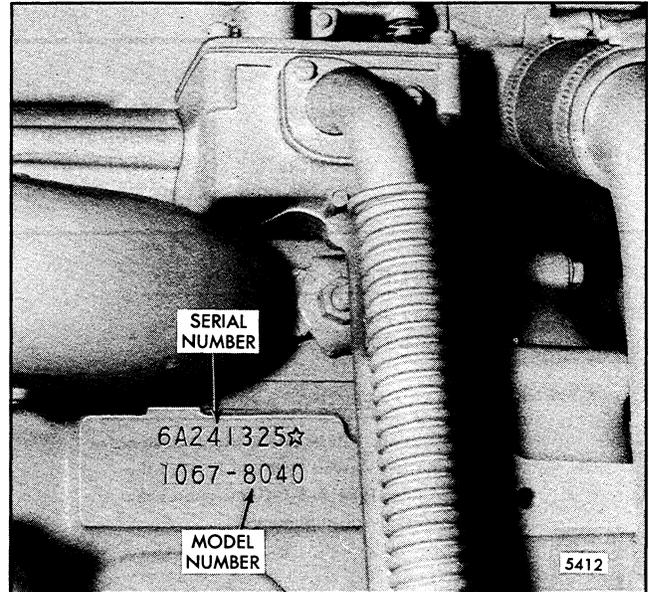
Typical Engine Serial Number and Model Number As Stamped on Cylinder Block (Current Engines)
